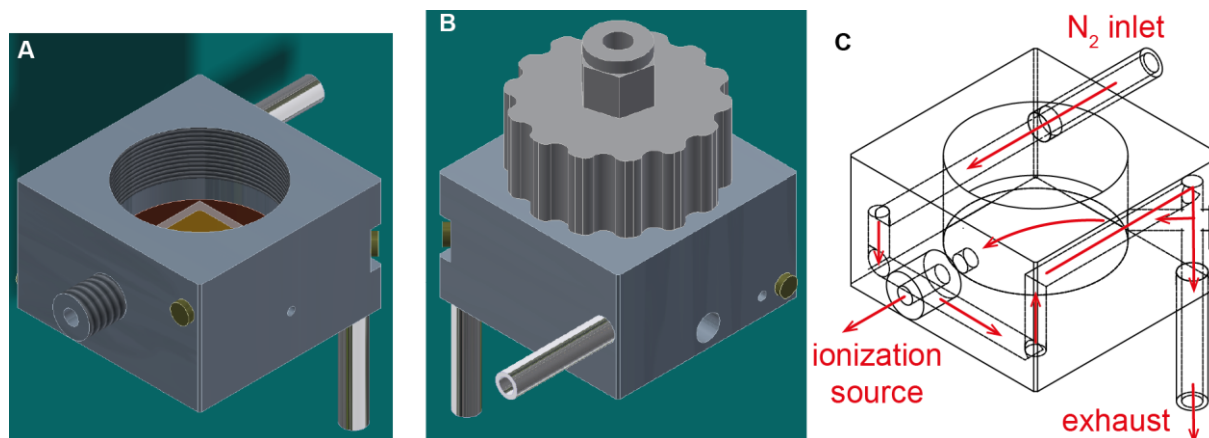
Technical drawings of the desorption chamber used for TPD-MS. (A) The sample (thiolate SAM on a gold coated cover slide) is placed on the bottom of the chamber, directly on the copper surface. (B) The chamber is closed by a titanium screw cap with a rubber seal. (C) The chamber is flushed with nitrogen during the measurement. Before reaching the sample, the gas is preheated by flowing through channels inside the copper block (red arrows).
